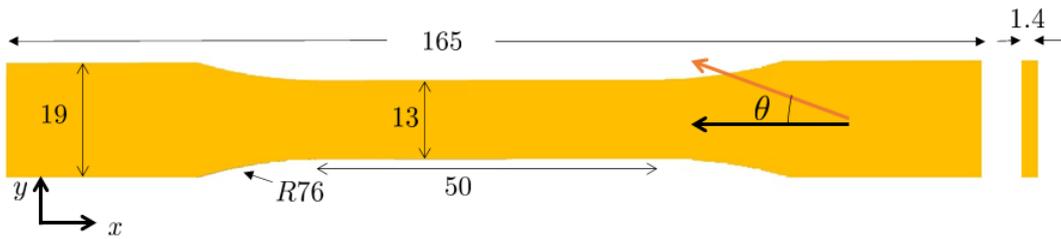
ASTM D638 type-I tensile specimen All dimensions are in mm)
